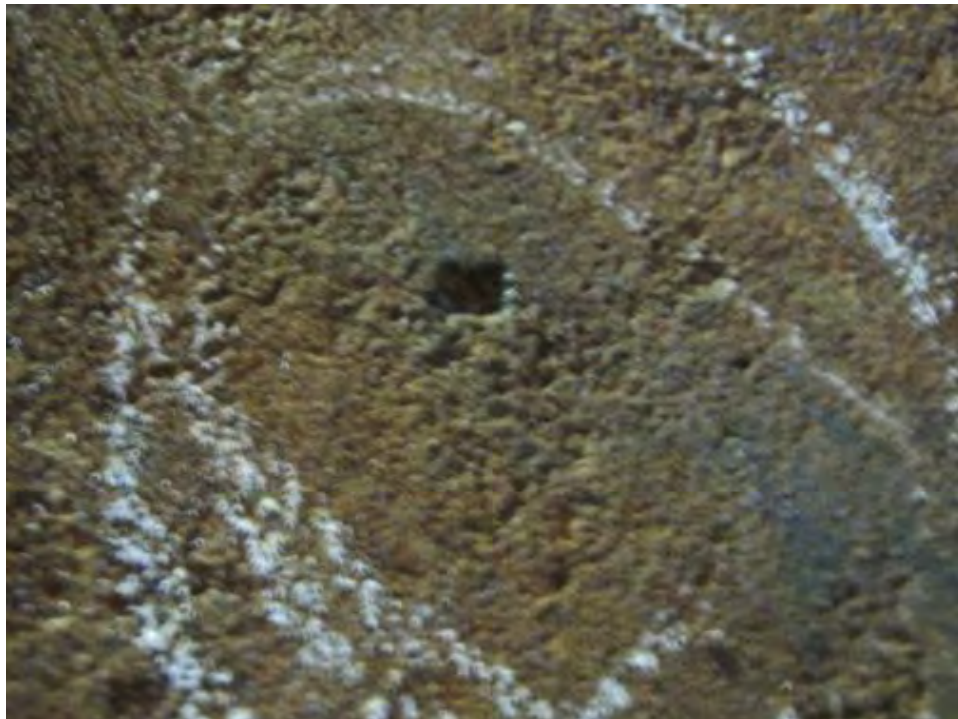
As above deep pit repair welded, general shallow pitting corrosion 0.030" and less, around deeper pit.
